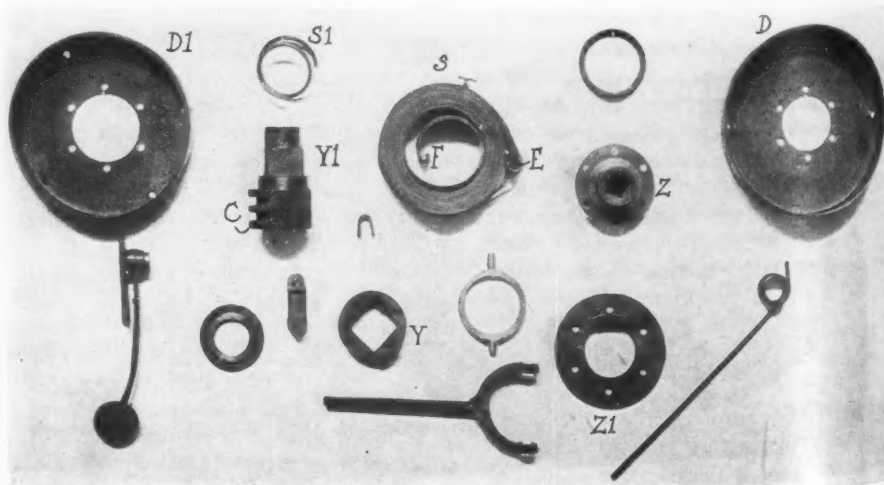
ASSEMBLY GARDNER SELF-STARTER
